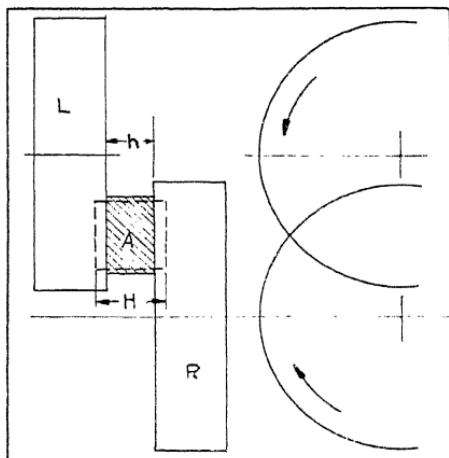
Disk-Shaped Roll Surfaces Showing Indirect Draft
